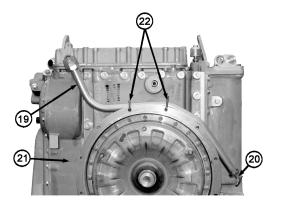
Oil Fill Tube Assembly. (X200-4A Only) (Repeated).
